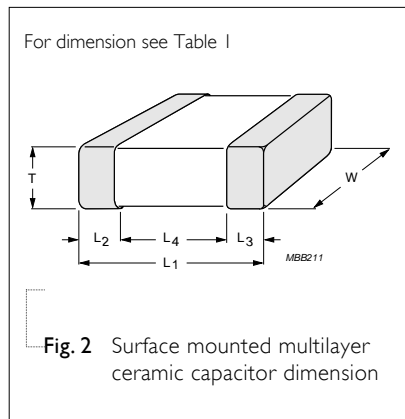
Surface mounted multilayer ceramic capacitor dimension
